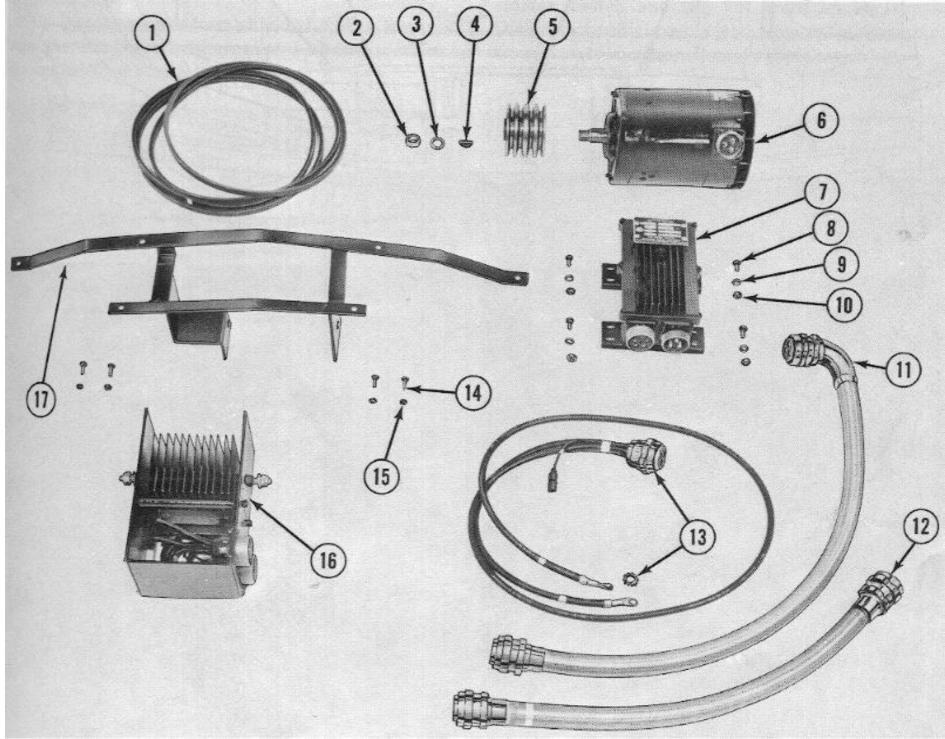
El---100 AMP. ALTERNATOR KIT (24-VOLT)
